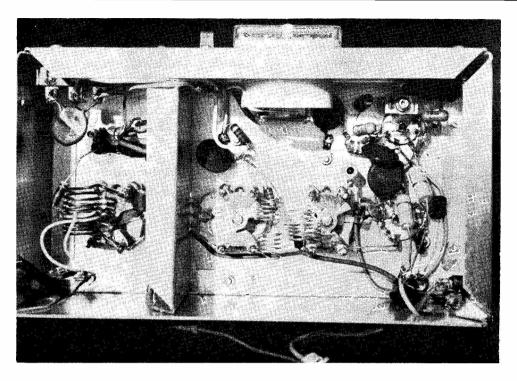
UNDER CHASSIS LAYOUT AND WIRING
